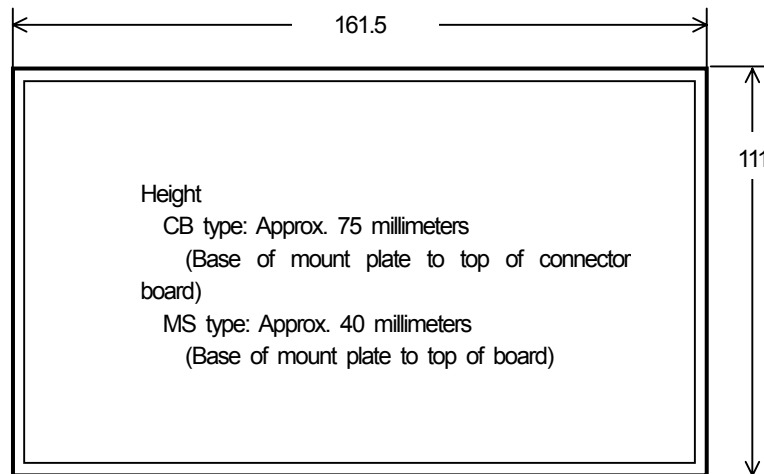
2-2 Dimensions of DIN Rail Mount Base
